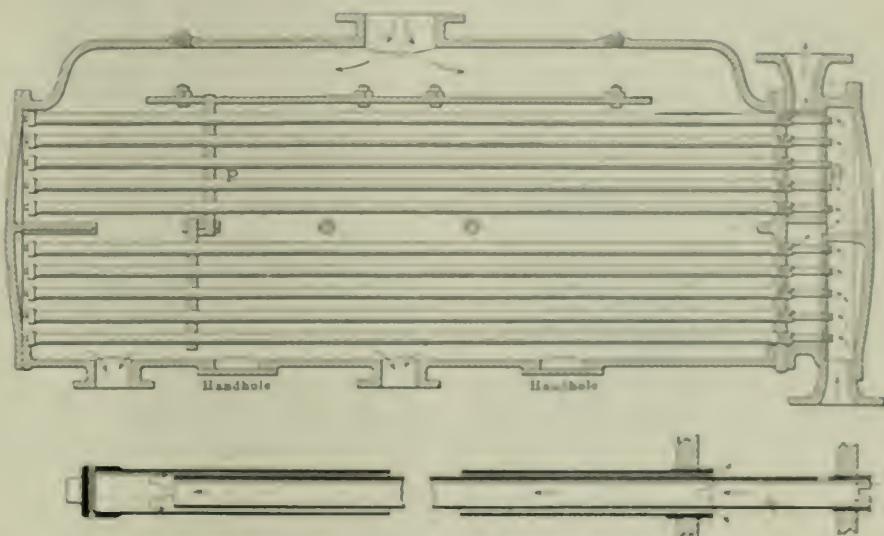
WHEELER FIELD-TUBE SURFACE CONDENSER
